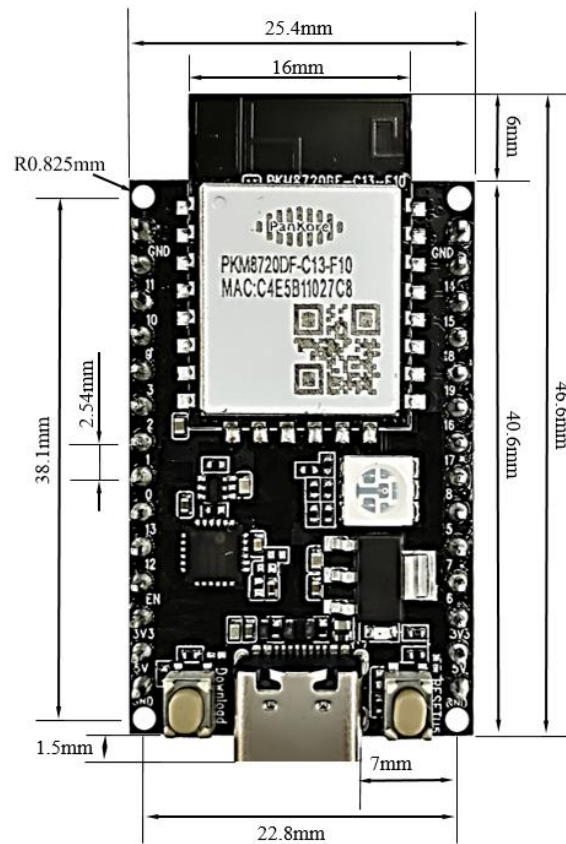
PKE8720DF-C13-F10 Board Dimensions
